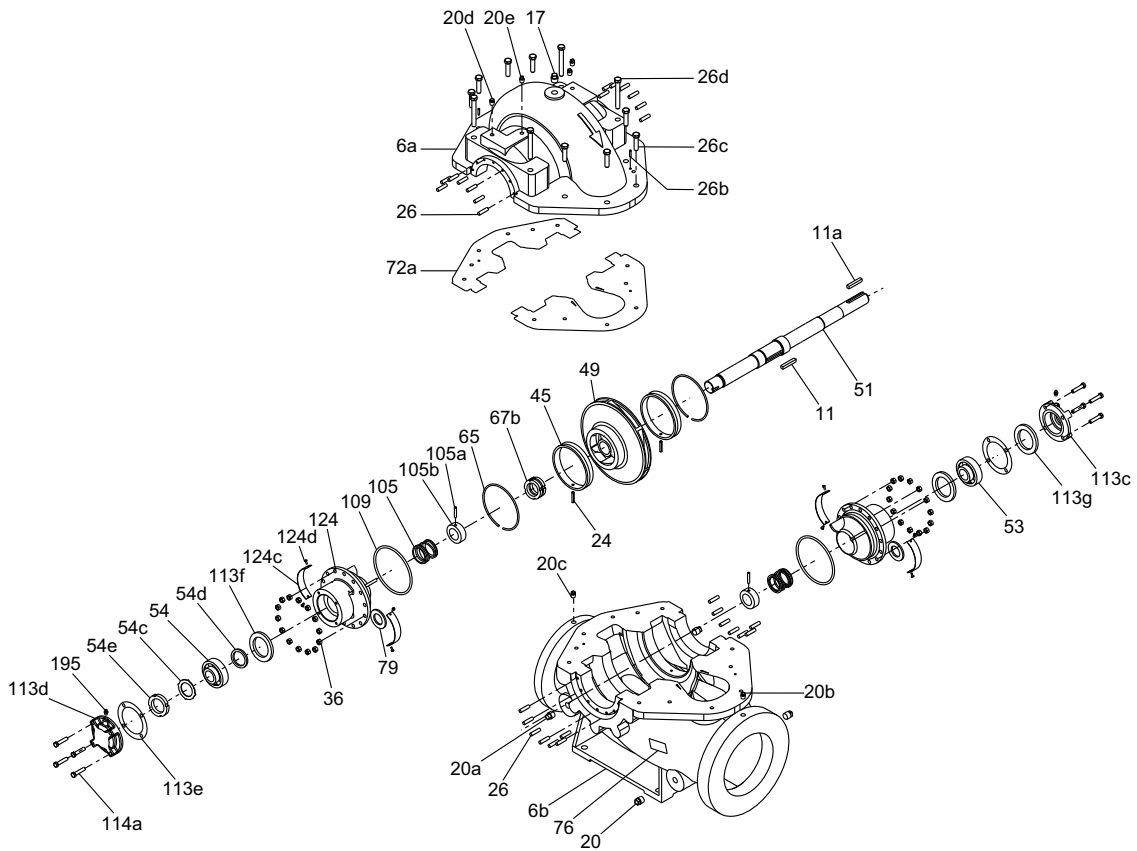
Construction type 1: LS 125-100-279, LS 125-100-305
